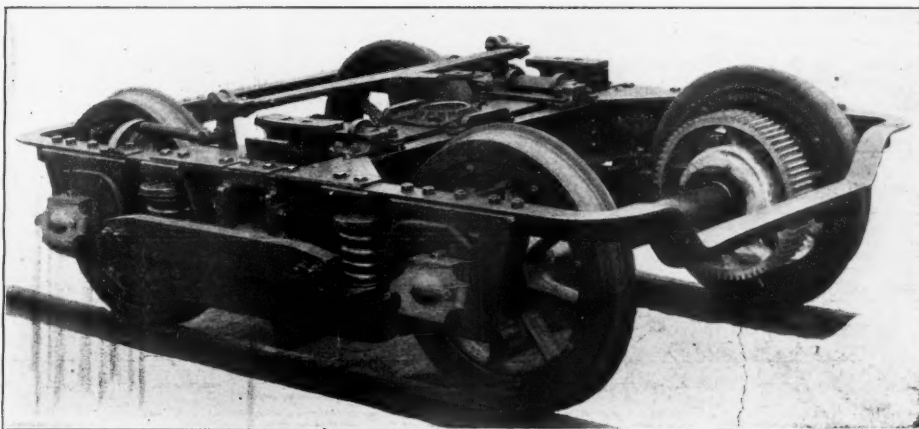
Motor Truck for the Manhattan Elevated Railway, Built by the American Car & Foundry Co.
